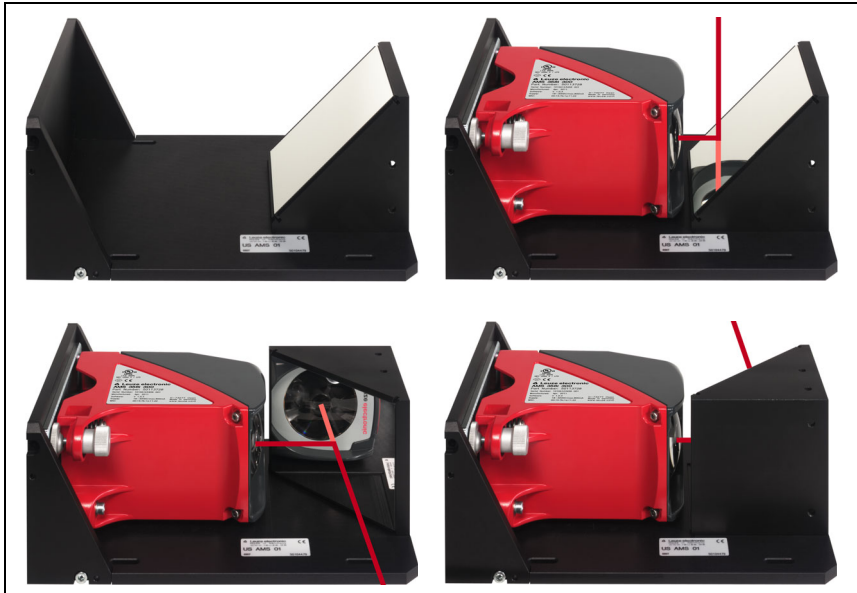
Mounting variants of the US AMS 01 laser beam deflector unit
